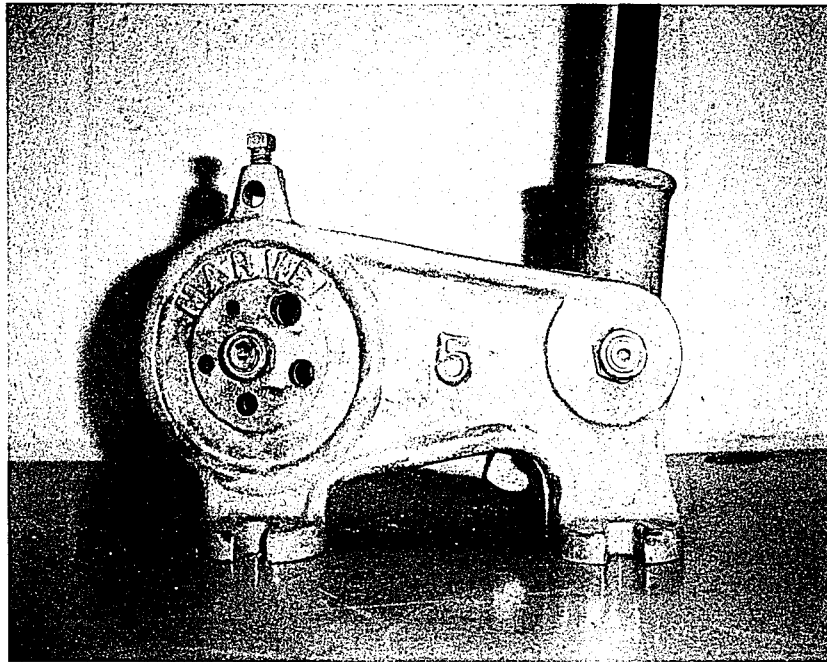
Wire shear used to cut long lengths of drawn wire into shorter extrusion blanks for the extrusion test.
